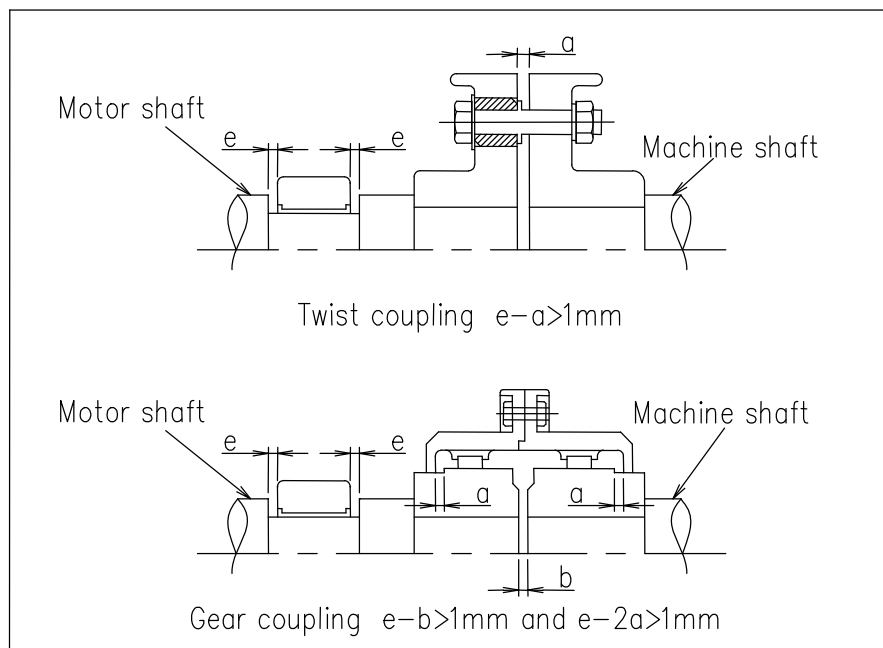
Relation between the end-play of the bearing and the flexible coupling
